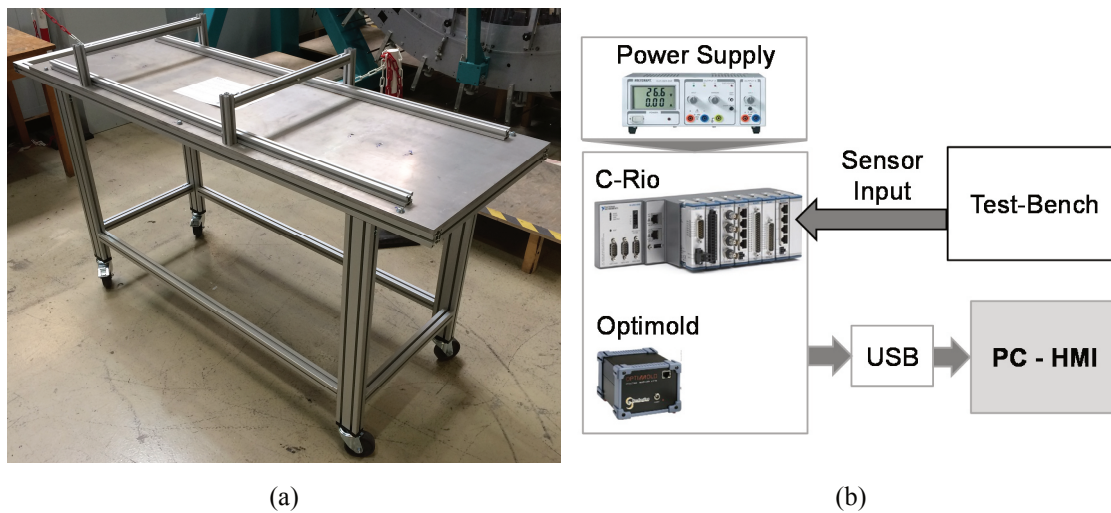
(a) Aluminum tool used in the manufacturing of the CFRP demonstrator (b) data-acquisition scheme
